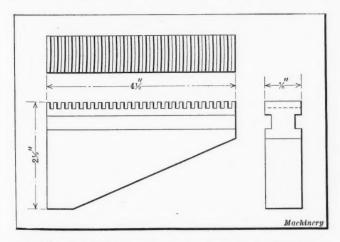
Detail Drawing of Jaws used on Scroll Chuck of Oil-groover
